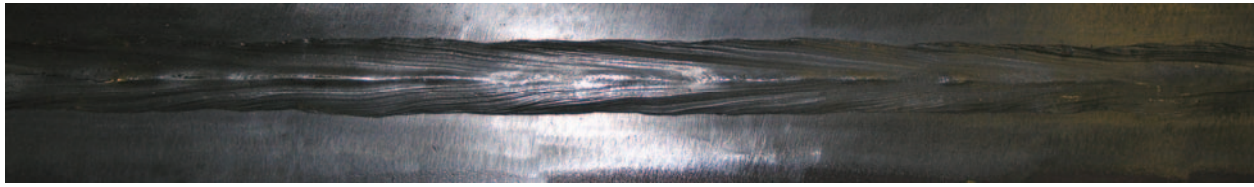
1” DH36 One-sided Weld, ESAB OK10.62 – Macro – 2.5X Mag
